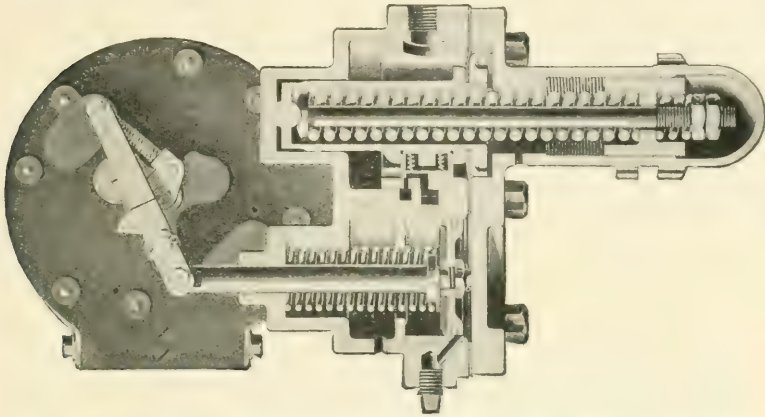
DIAPHRAGM SLIDE VALVE TYPE OF GOVERNOR—PNEUMATIC PARTS
